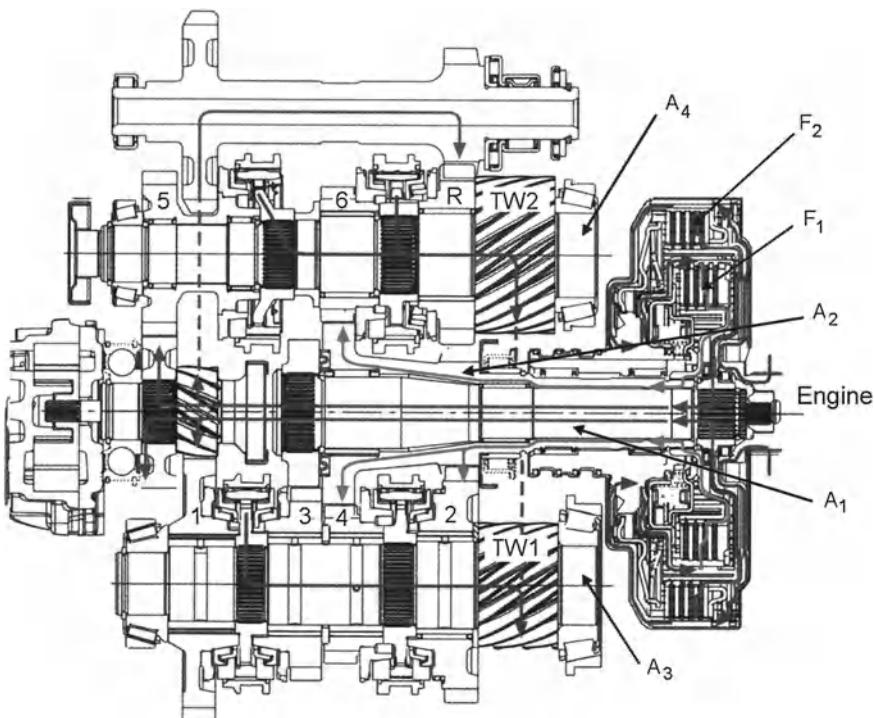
Working scheme of a powershift dual-clutch six speed gearbox (courtesy of Audi)
